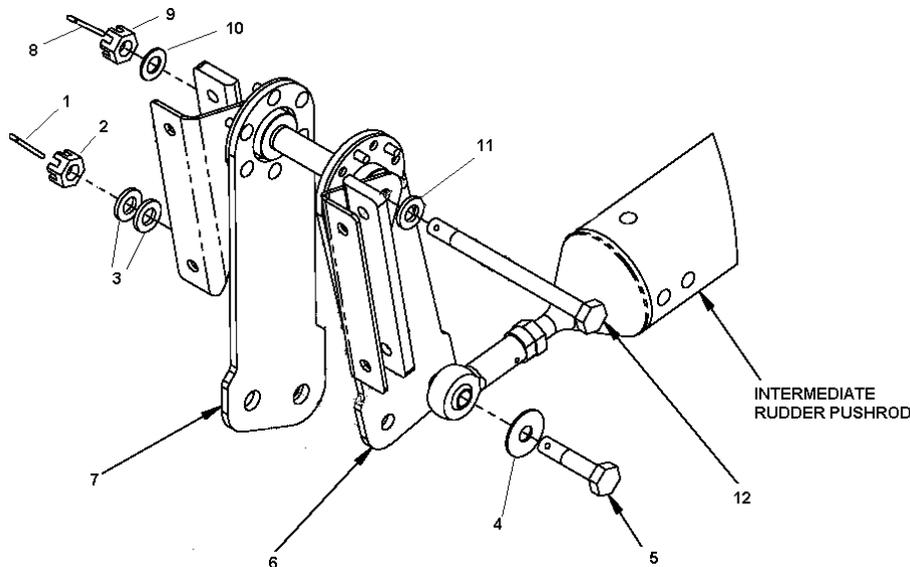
Intermediate Rudder Pushrod and Center Idler-plate
